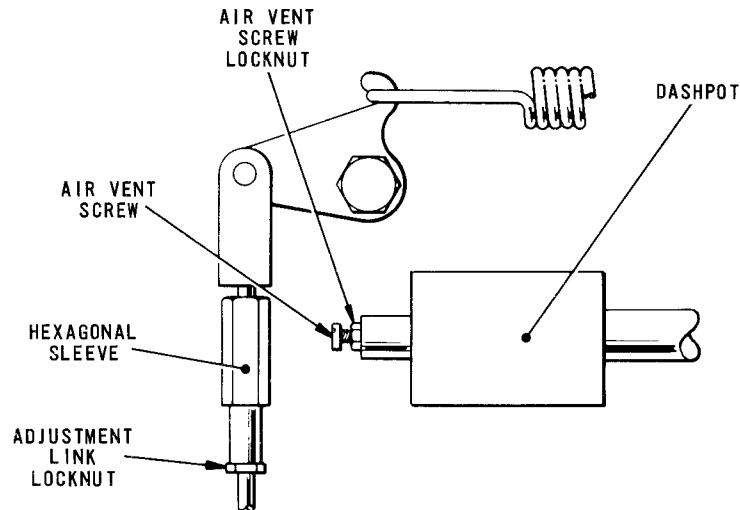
DASHPOT/PRINT SPRING MECHANISM
